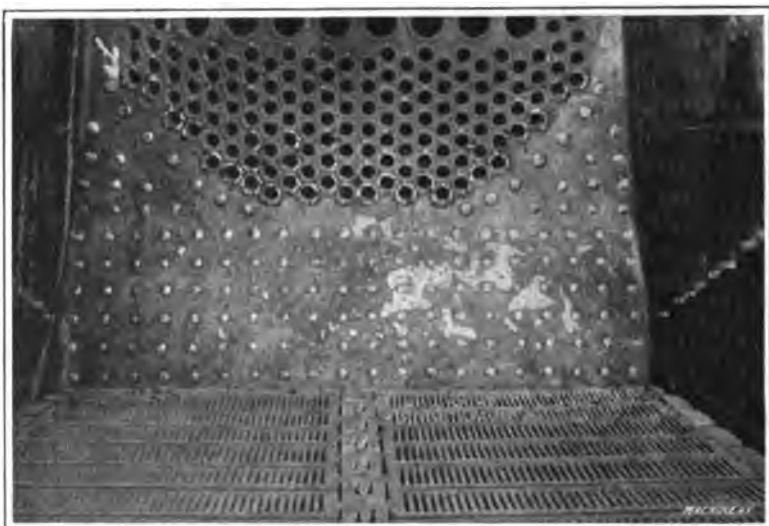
Superheater Flues after Welding is completed
